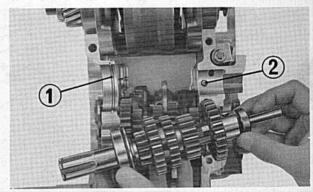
(1) Ball bearing retaining ring (2) Knock pin
